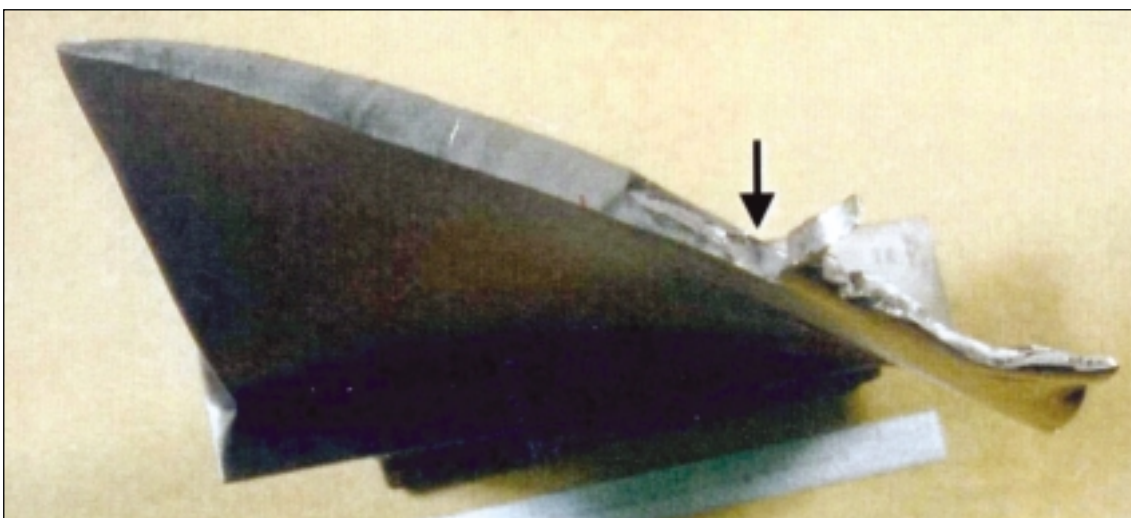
Inner airfoil fracture surface of fan blade 12
